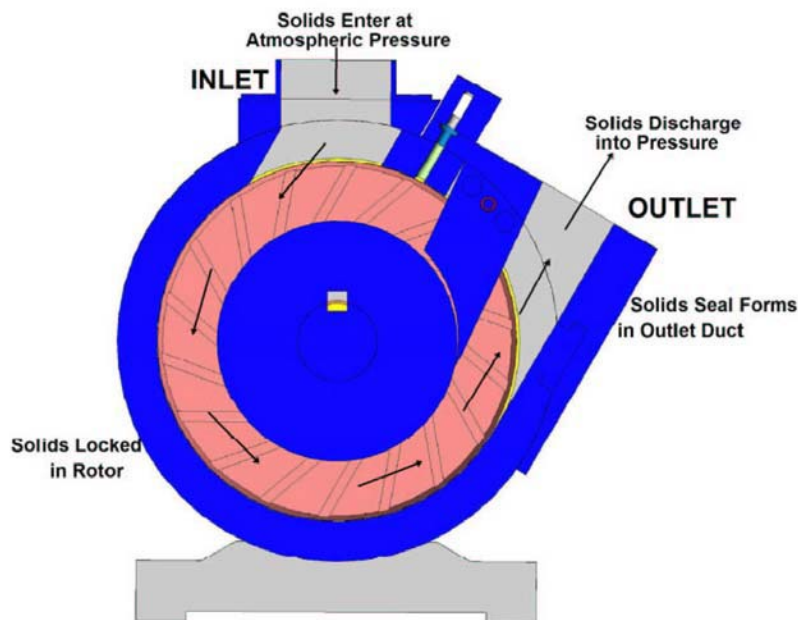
Layout of Stamet Posimetric[®] Pressure Feeder
